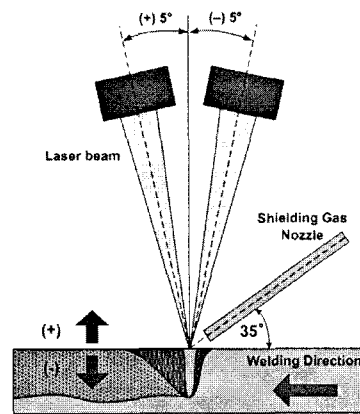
Schematic diagram of Aluminum alloy laser welding
